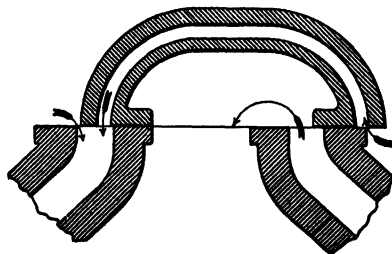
Trick Valve Showing Admission of Steam Just Beginning
